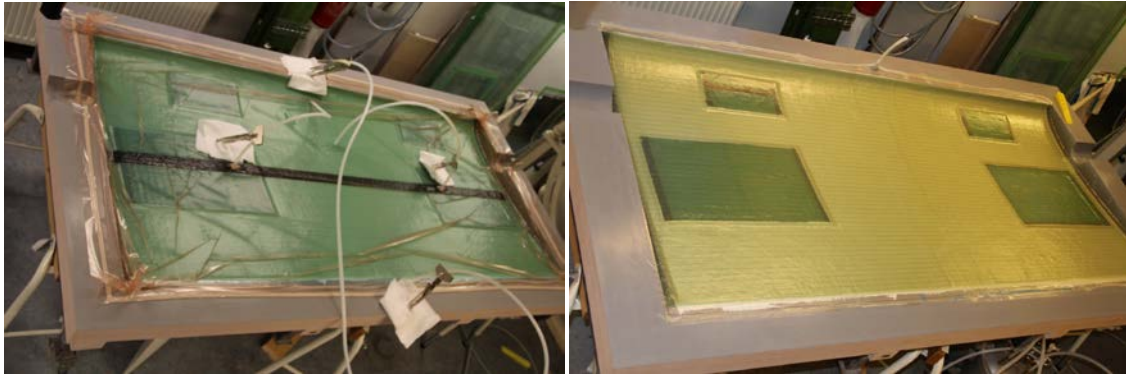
Assembly of a side pod from two composite shells in one of the molds.
